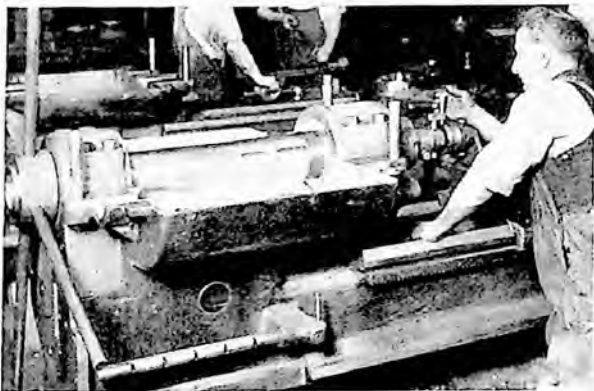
Checking a Reconditioned Machine to Make Sure that Spindle Lies Parallel with Bed
